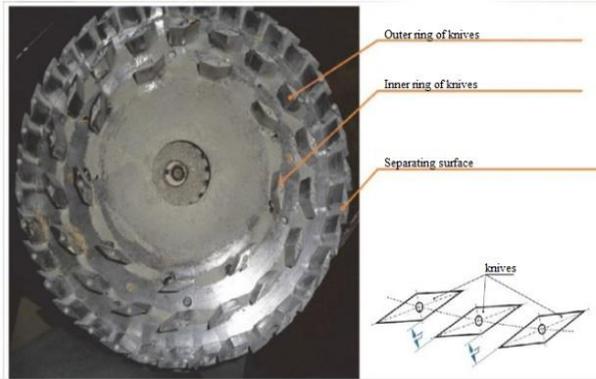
General view of the upper disk of the shredder with a separating surface and installed knives, scheme for controlling the separating surface opening
